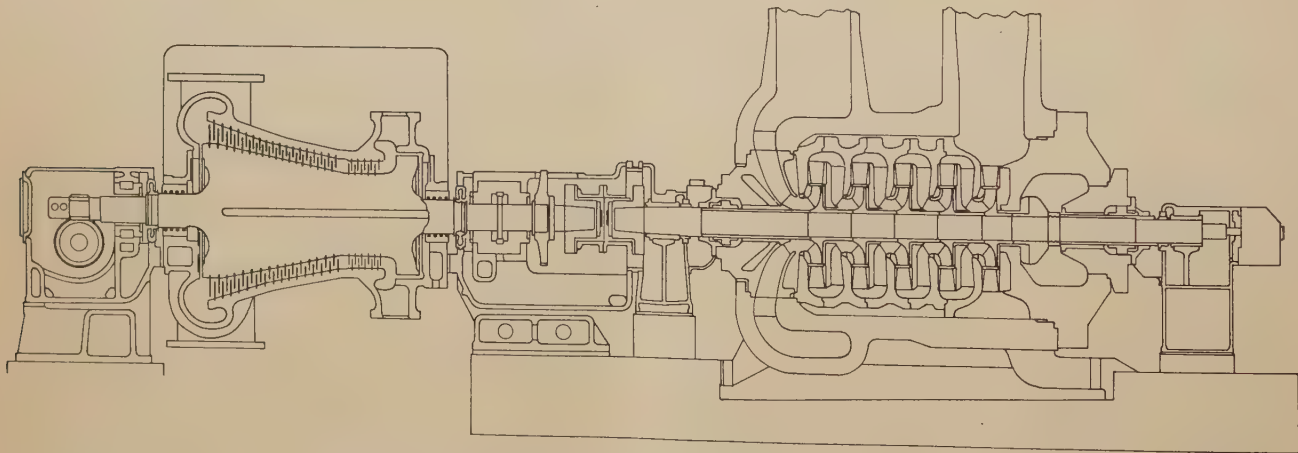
Arrangement of a Parsons bled steam turbine driving a Weir pump
